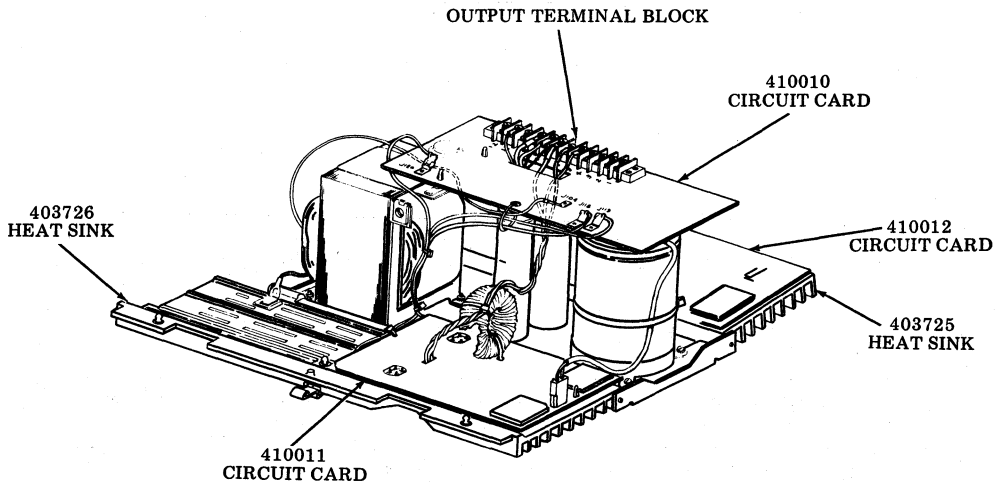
Layout of 40PSU102 Power Supply for Testing
